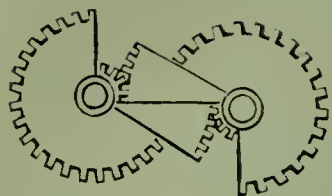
A kind of gearing used to transmit great force and give a continuous bearing to the teeth. Each wheel is composed of 2, 3, or more distinct spur-gears. The teeth, instead of being in line, are arranged in steps to give a continuous bearing. This system is sometimes used for driving screw-propellers, and sometimes, with a rack of similar character, to drive the beds of large iron-planing machines.
